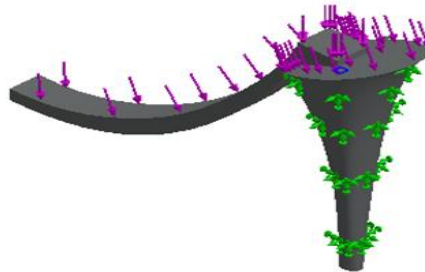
Loads and Fix Geometry of the Shank Piece and High heel
